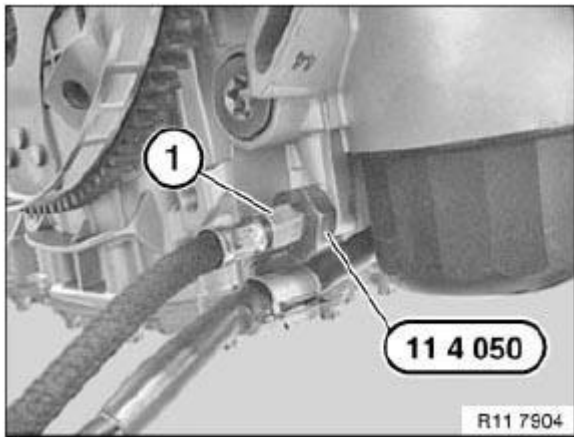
Identifying Special Tool (11 4 050) With Union Nut
